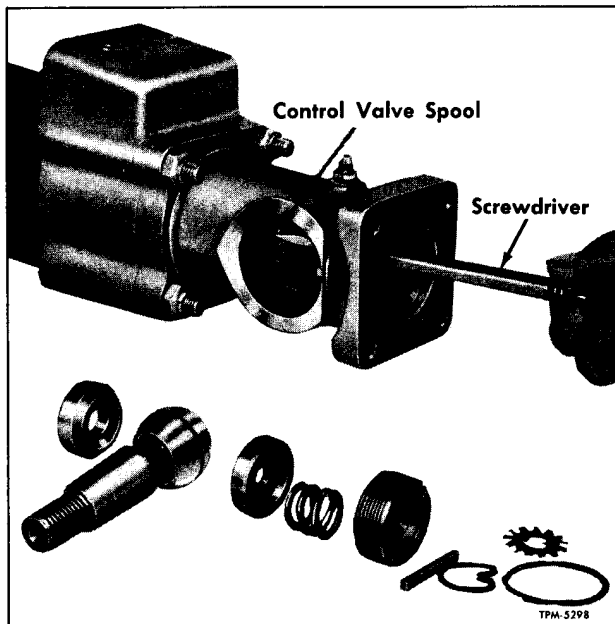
Adjusting Booster Cylinder Control Valve Spool
